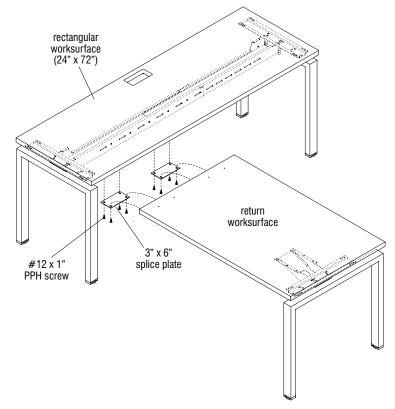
Single-Sided Fixed Benching, Perpendicular Support Frame Installation
